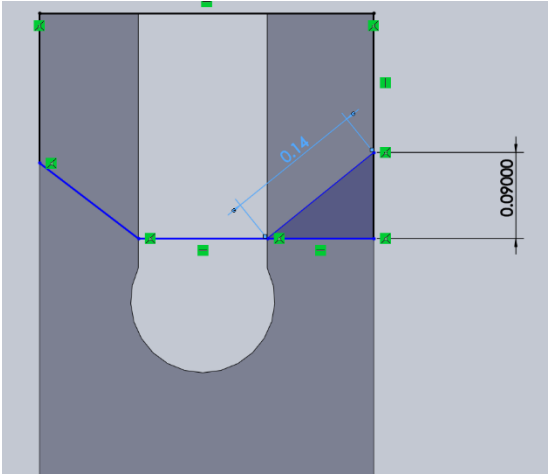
Original Dimensions of the V-Cut on the Axle Mounts
